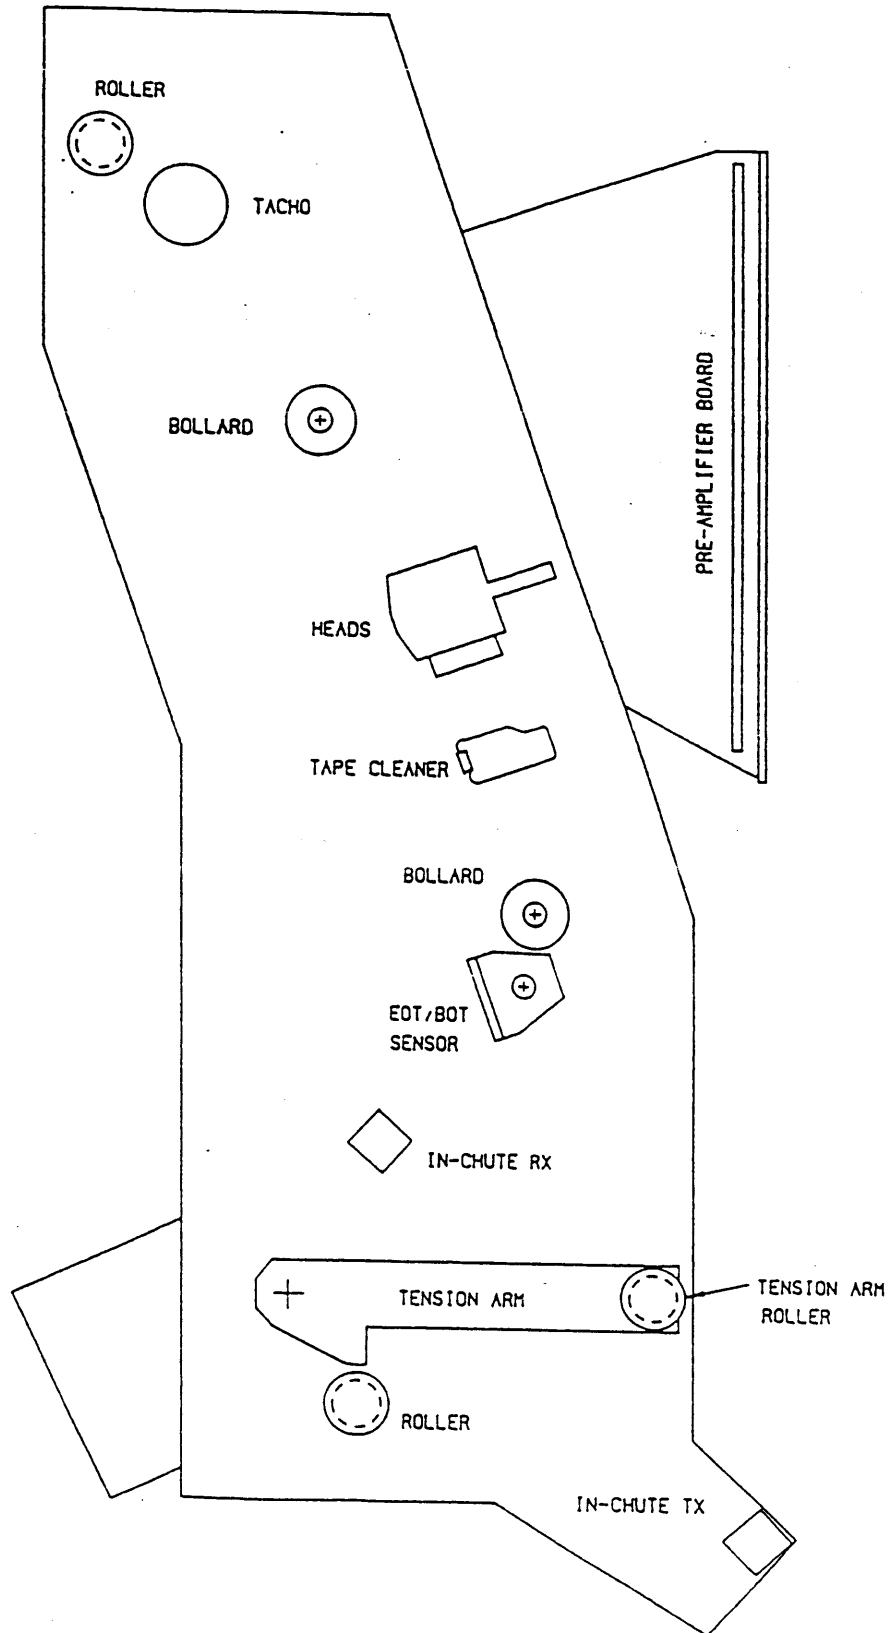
9914 TAPE PATH ASSEMBLY TOP SIDE
